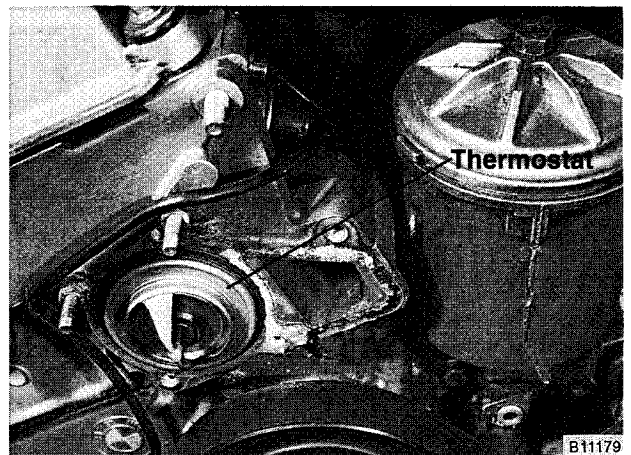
Thermostat housing shown removed (6-cylinder engine).
